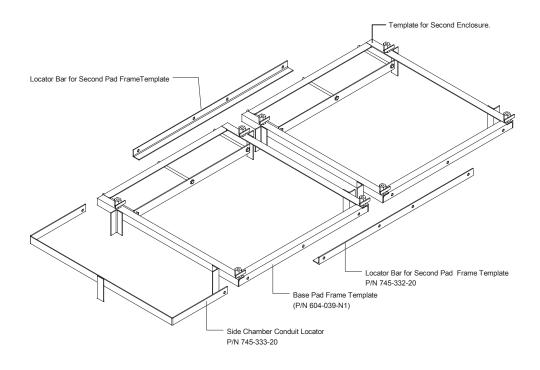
, Isometric View, Pad Frame Template, Dual MiniBay with Side Chamber
